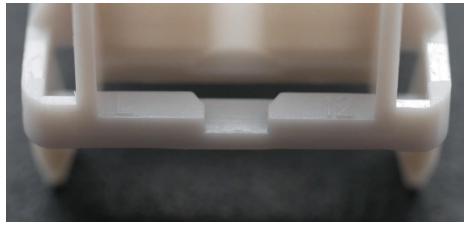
Close up zoom of top housing mold markings on the Cookies n' Cream switches.
